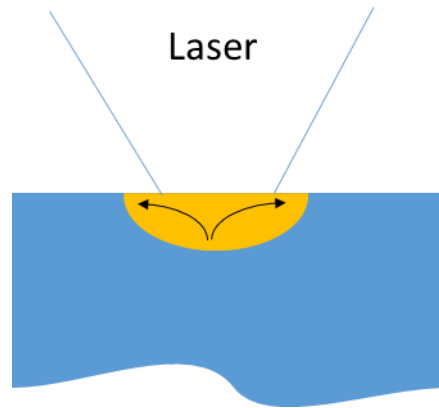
Illustration of laser melting induced molten pool reflow driven by surface tension.
